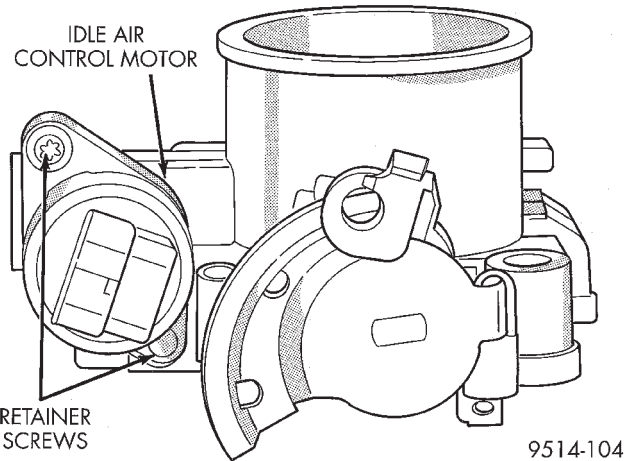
Throttle Position Sensor and Idle Air Control Motor—2.5L
